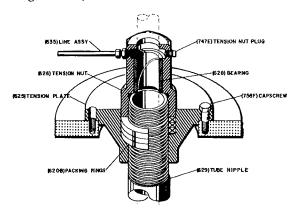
Tension Plate Assy (Drip Feed Lubrication)
